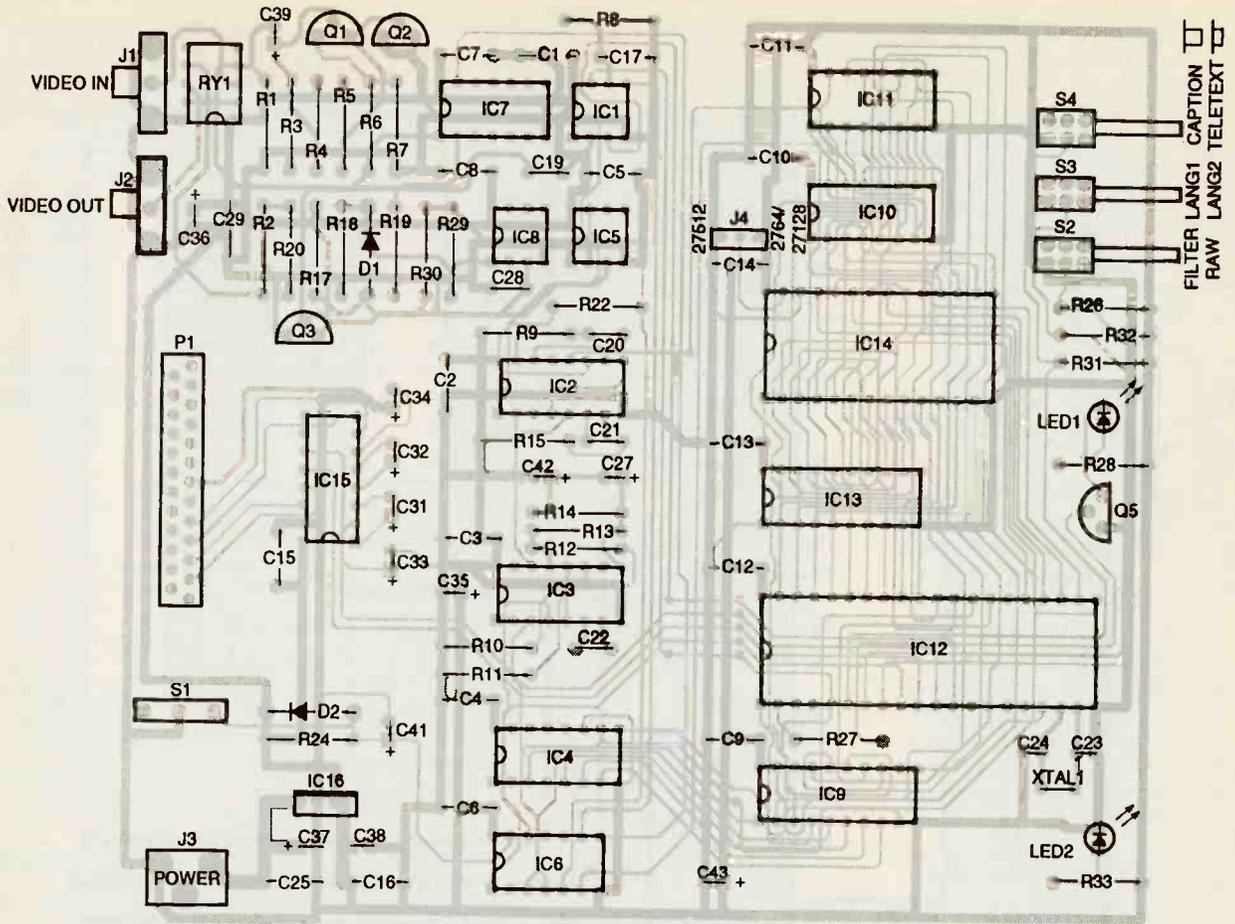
PARTS PLACEMENT DIAGRAM. If you make your own double-sided board, solder all of the component leads on both sides of the board, and install a wire jumper in any through holes that don't have a component lead in them.
